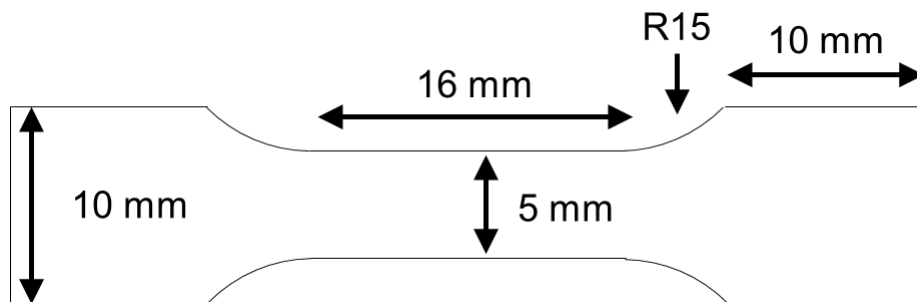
Specimen shape of uniaxial tensile test.
